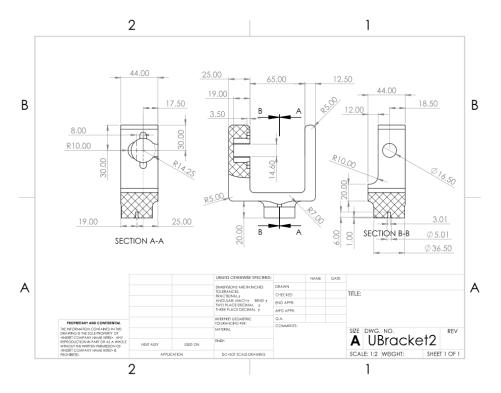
U-BRACKET DRAWINGS (DIMENSIONS IN INCHES)
